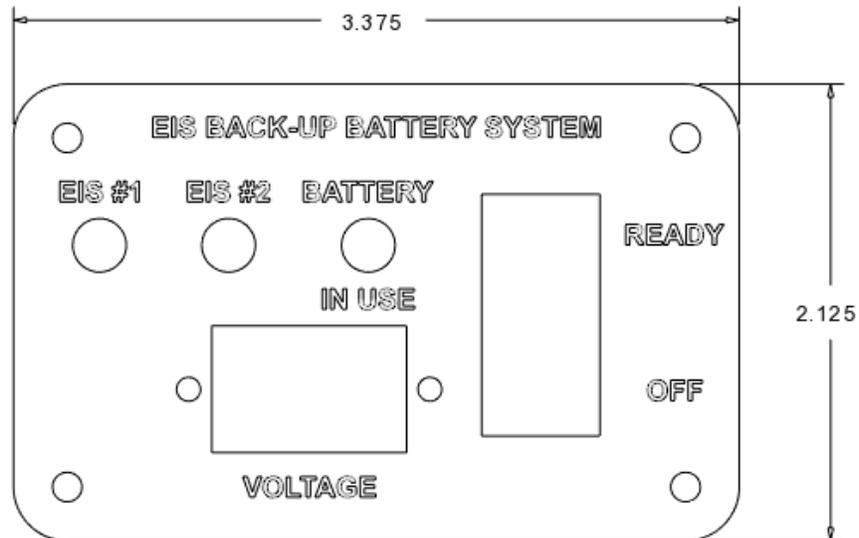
EIS Back-up Battery System Panel Overall Dimensions (inches)
